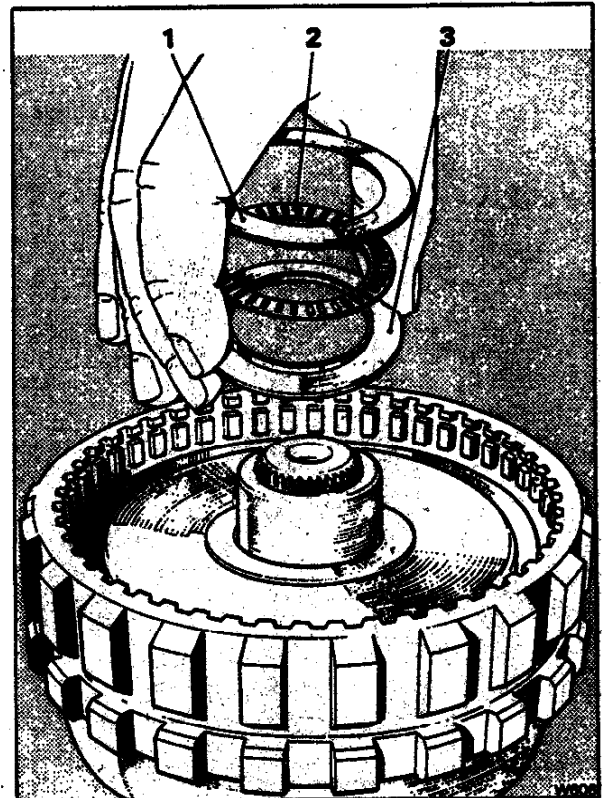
Fitting the races and thrust bearing to the outer face of the rear internal gear
